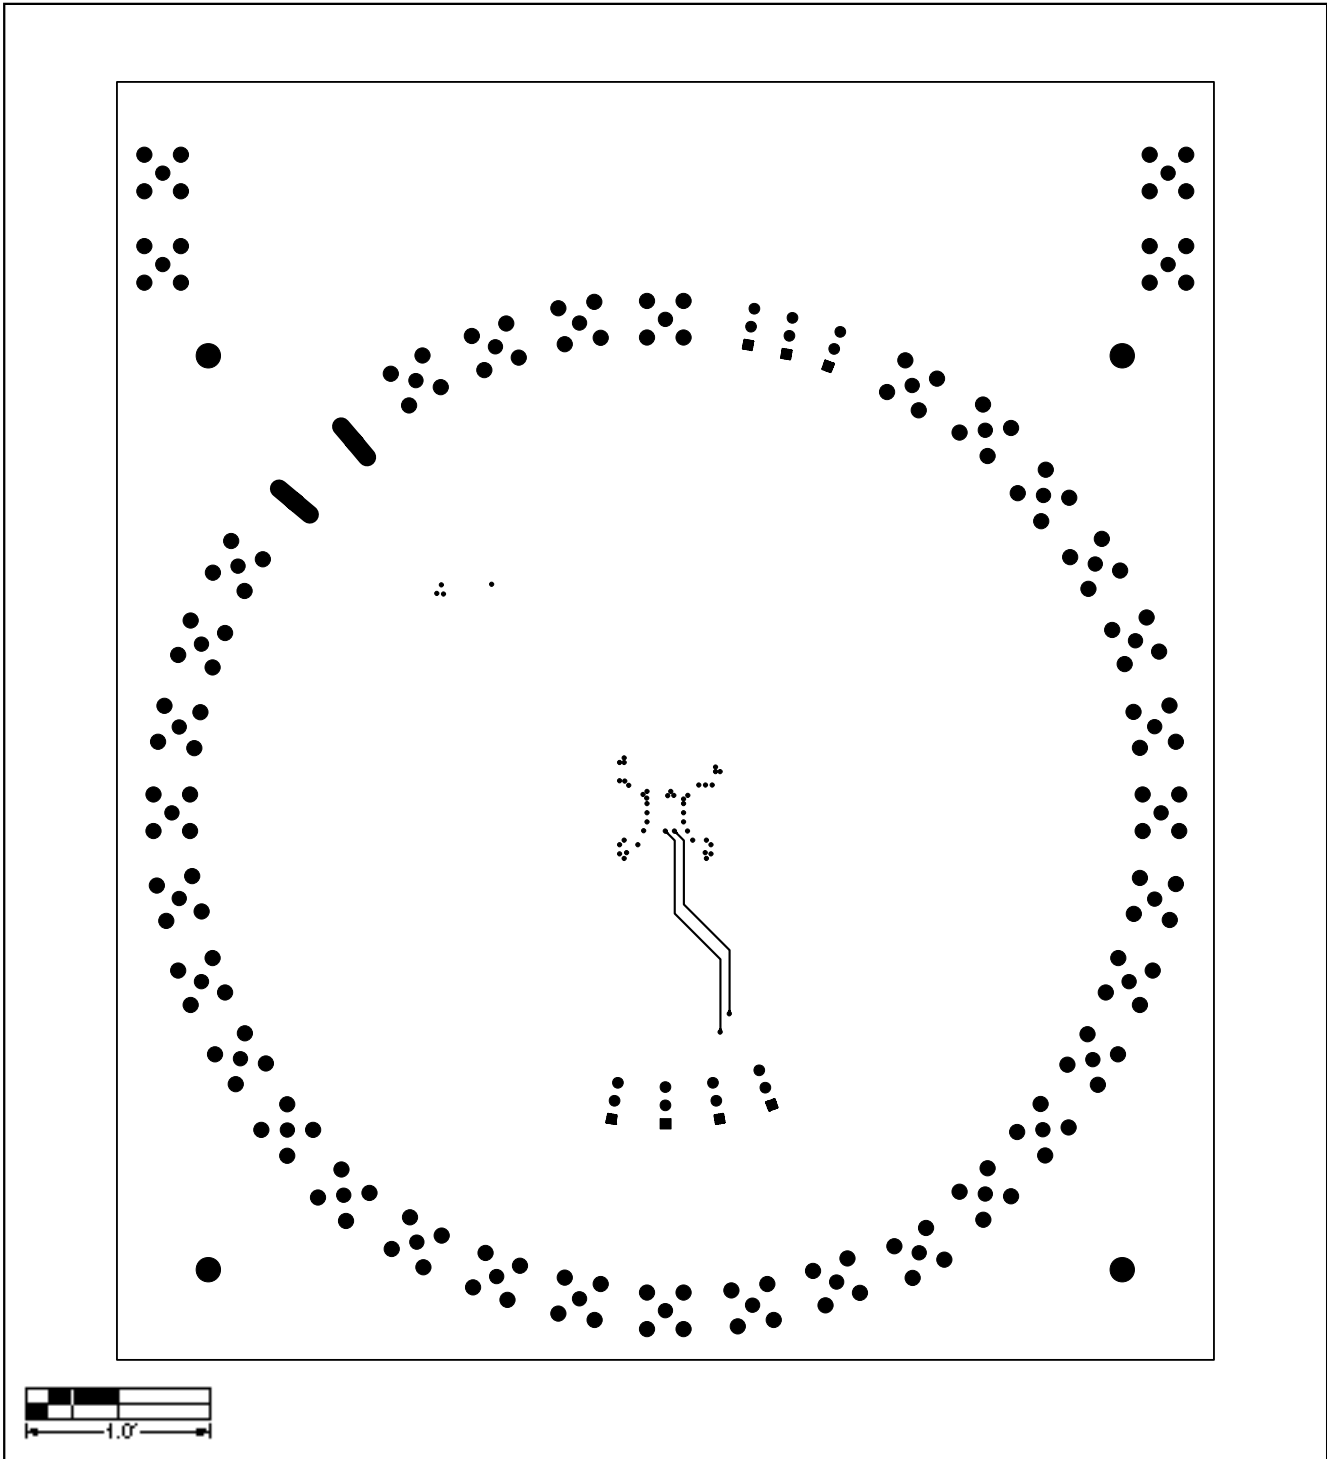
MAX3640 EV Kit PC Board Layout—Solder Side
